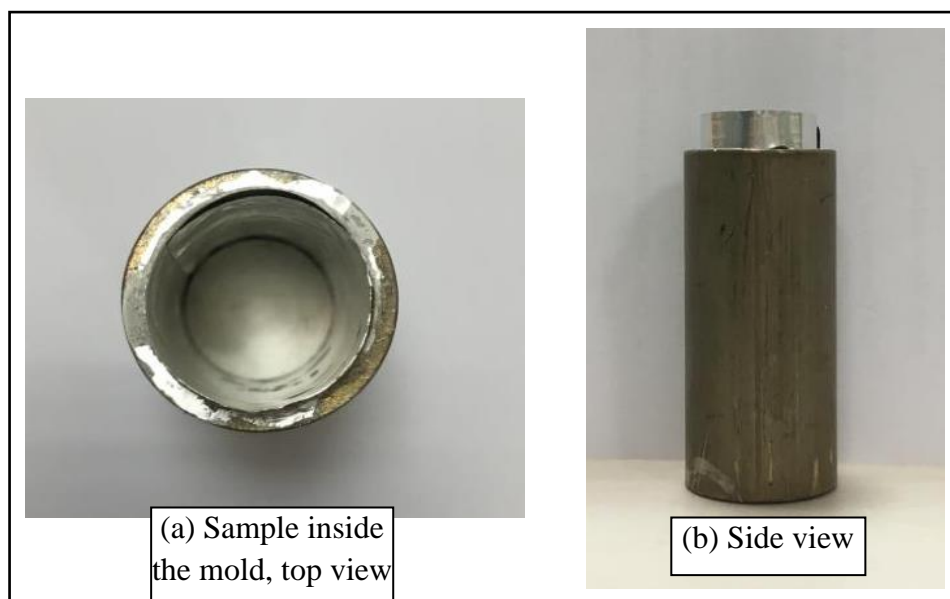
Prepared tablet inserted inside a thick aluminum sheet and a mold on a stainless-steel base ready to be foamed
